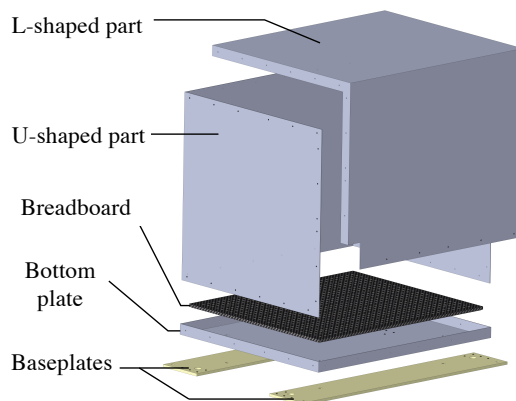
Exploded view of the magnetic shield structure - It consists of three parts: a bottom plate, a "U" shaped section, and an "L" shaped cover (gray). Its base is fixed between the base plates (gold) and the breadboard (black) using 4 M12 screws. The baseplates are used to fix the experiment to the simulator or on the rails of the plane.
